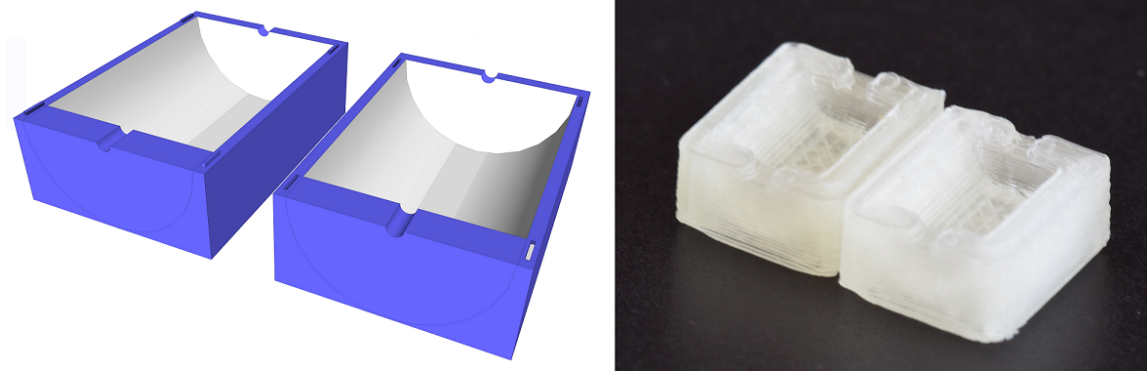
Schematic drawing of the mold (left) and a 3-D printed mold (right)
